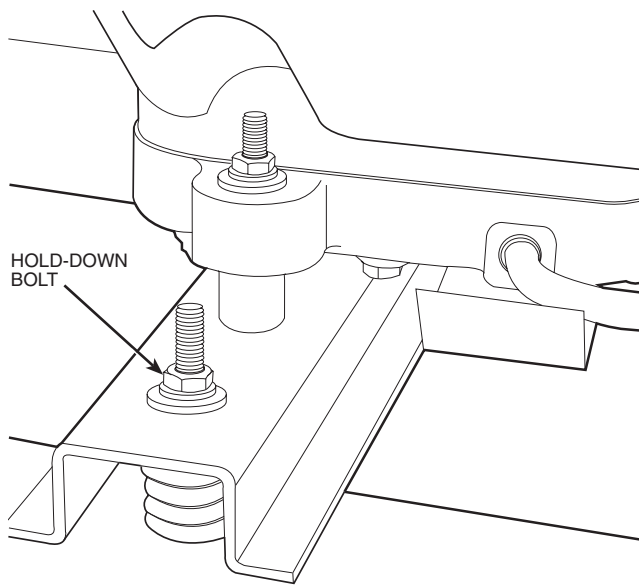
Compressor Mounting View; Unit Sizes 040-070
